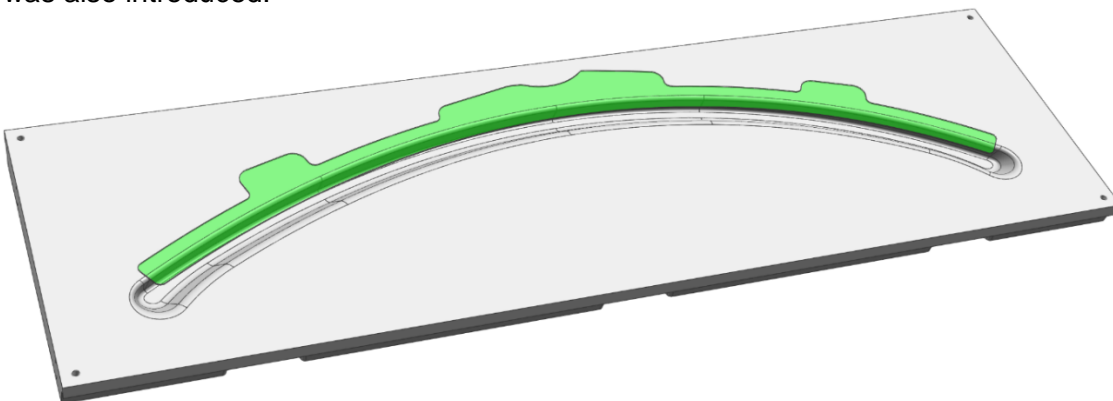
Shrink flange with undercut. Tool size 1500x450 mm.
